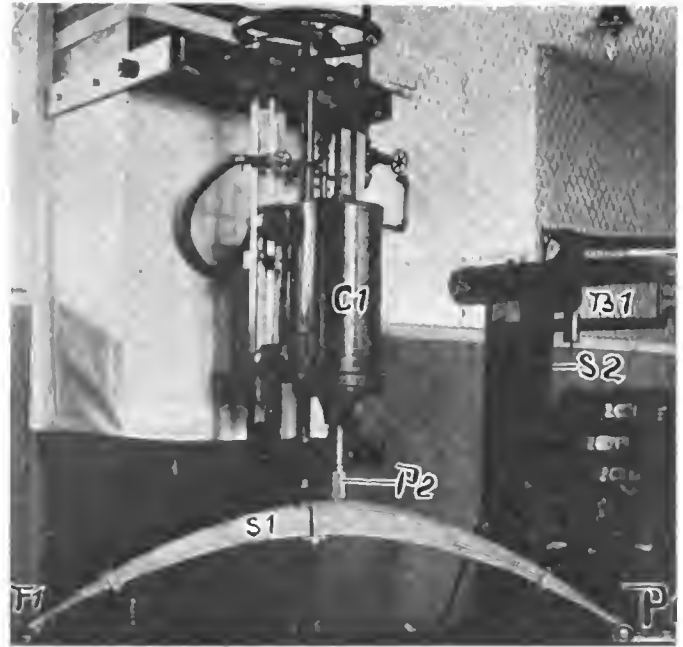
Spring-testing machine, showing the spring depressed to the limit, and the scales recording the load
